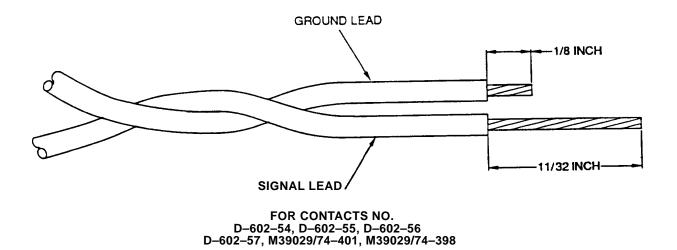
Strip Dimensions for Twisted Pair Solder Contacts
